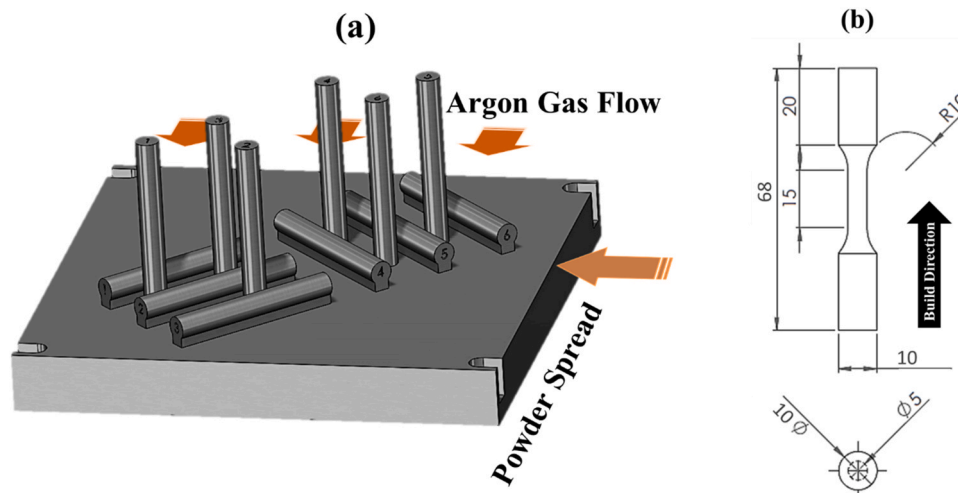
(a) The build layout, and (b) drawing of the final geometry after machining for the fatigue specimens following ASTM E606 (note that the dimensions are in ‘mm’ and the build orientation shown is corresponding to a vertical specimen).
